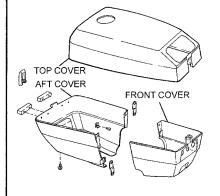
The 3/4 hp and 4 Deluxe motors are unique, as they have a 2-piece front and aft cover assembly
